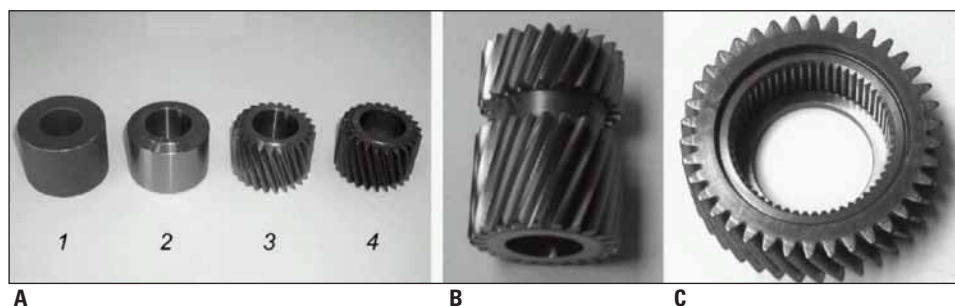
Machining steps of a planetary gear: 1) forging; 2) turned blank; 3) soft-hobbed gear; 4) hardened and finished gear (Ref. 4).
